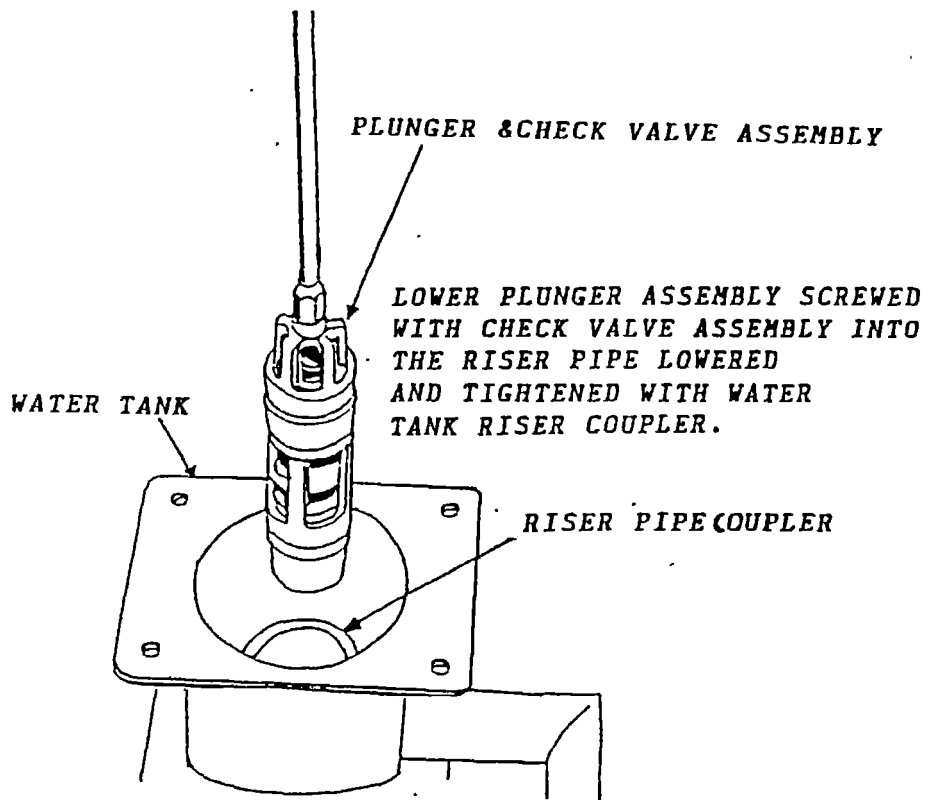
INSERT PLUNGER ASSEMBLY IN THE RISER PIPE
